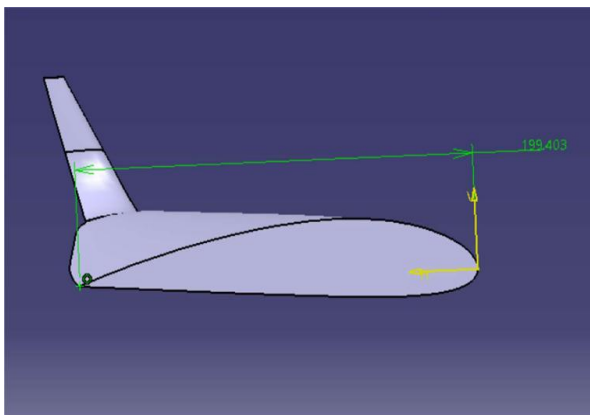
Isometric view of the wing-winglet assembly (CATIA)
